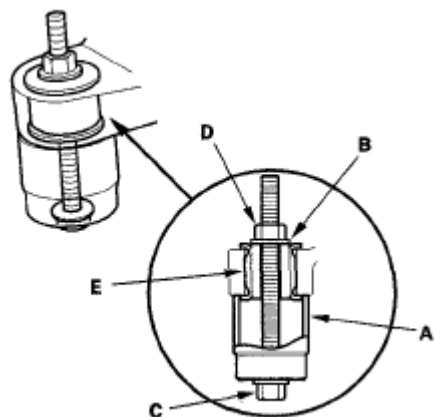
Identifying Socket Wrench On Flange Part Of Gearbox Housing With Washer
